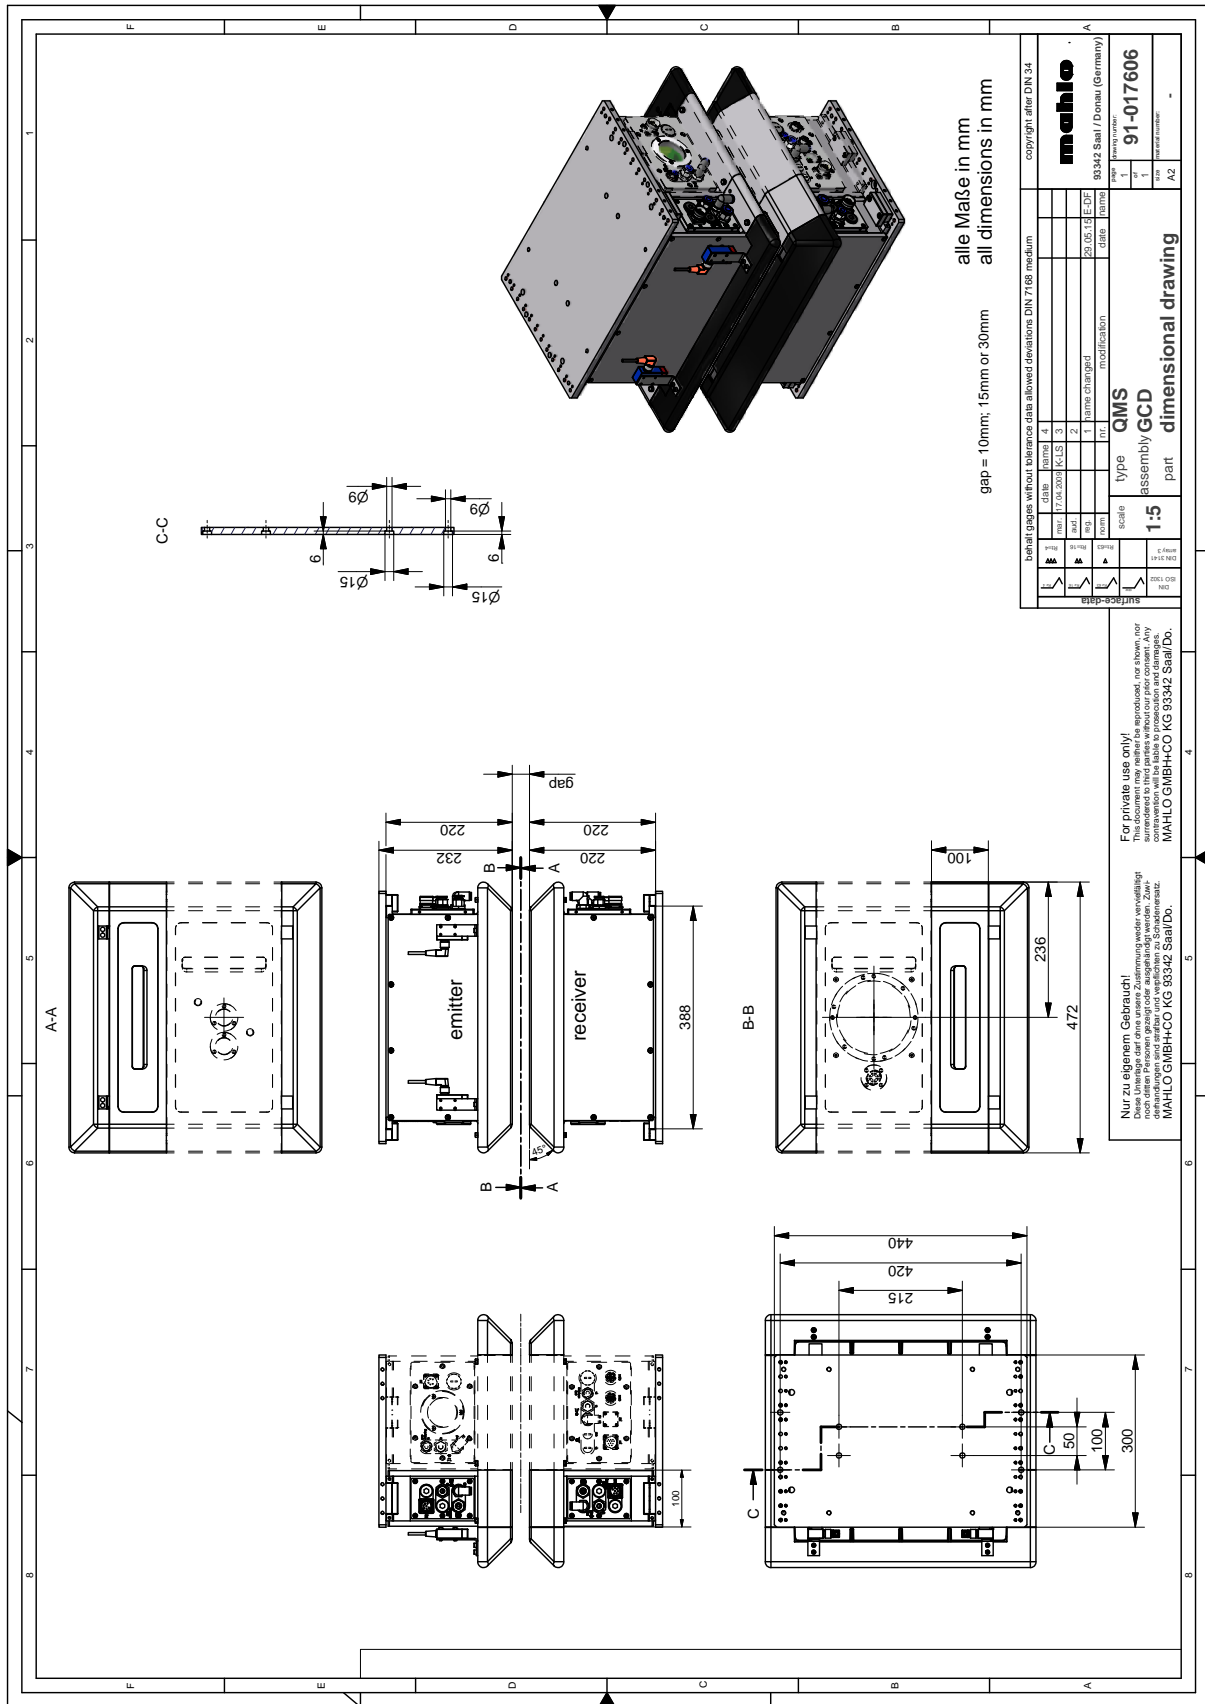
Dimensional drawing of Gap Conditioning Device GCD, 91-017606-01
